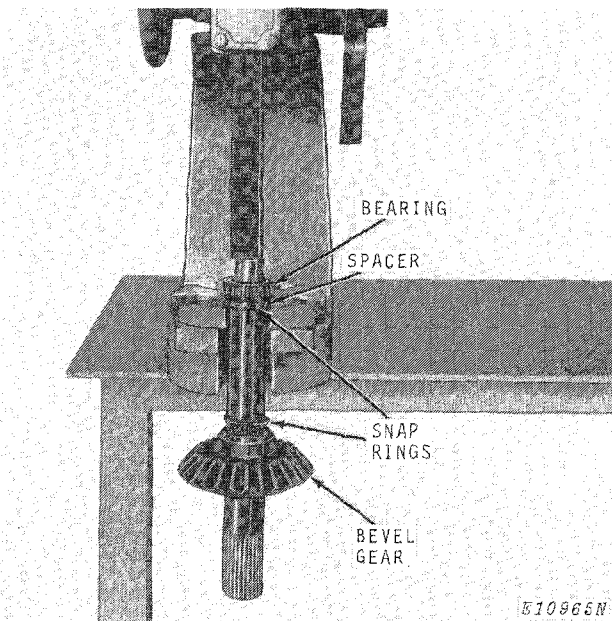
Removing the Ring Bearing, Spacer, Snap Rings, and Bevel Gear from the Input Shaft
